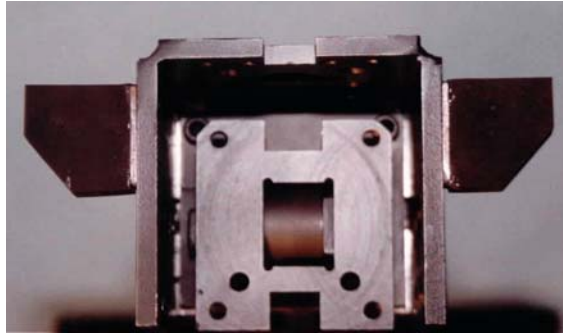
Outer stop assembly on UTS weldment
